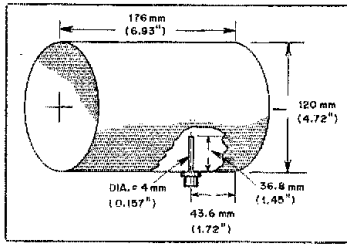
The tubular radiator for 1691 MHz consists of a metal cylinder with one end open. This end faces the dish. The rod element should be soldered directly to the type-N connector. The connector should have a provision to slide 5 mm (0.197 in.) forward and backward to find the best position.
